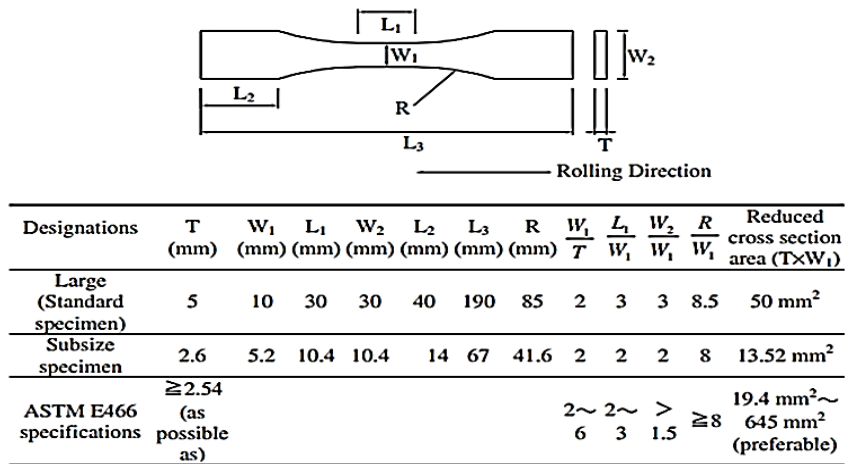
ASTM E466 standard high cycle fatigue specimens [155], all dimensions in mm.
